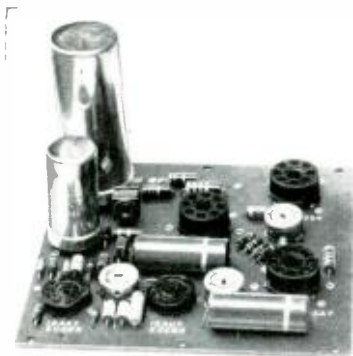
Printed circuit for the Ultra-Linear II is completely wired and tested as received by the kit builder.
